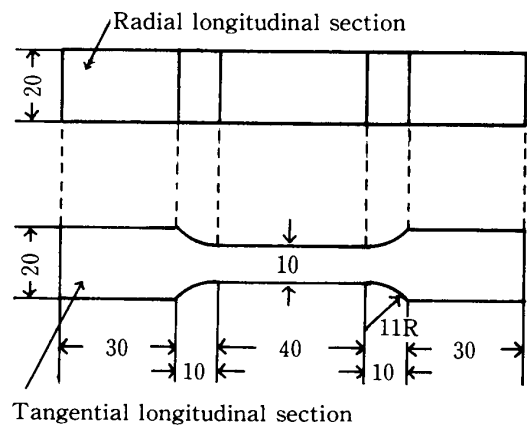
Shape and dimension of compression test specimen. (Dimensions in mm)
